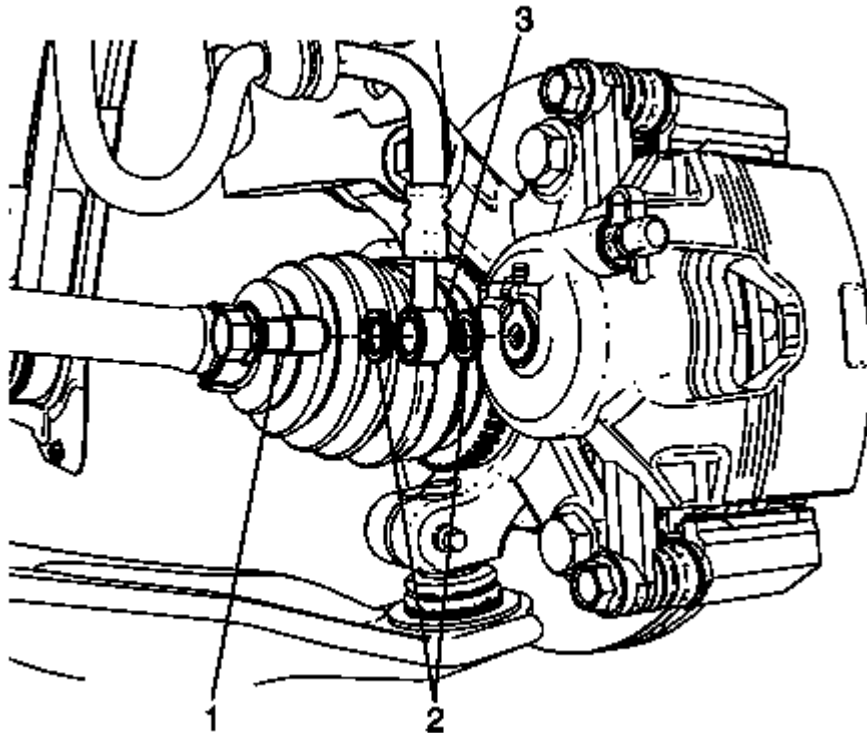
Copper Brake Hose Sealing Washers And Brake Hose
